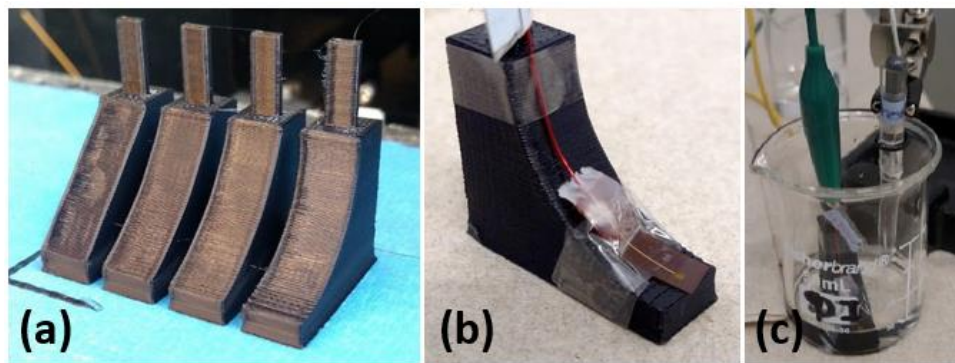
Flexibility testing. (a) printed PLA fixtures; L>R: 0°, 30°, 45°, 90°. (b) probe attached to 90° fixture. (c) fixture and probe in test bath.
